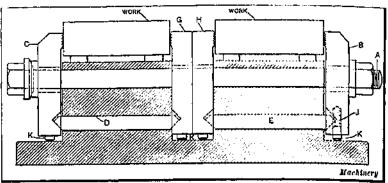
Mechanism for Drawin g down Both ends of Two Pieces by a Single Nut
